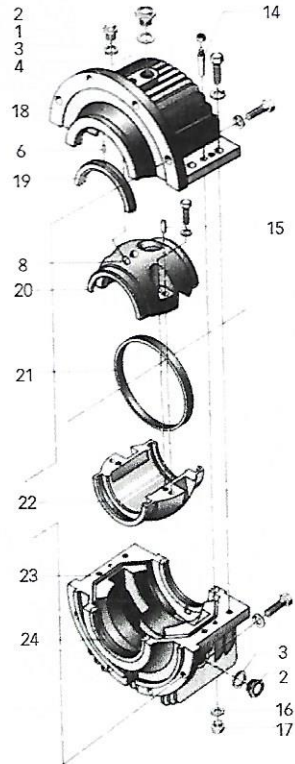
Ring-lubricated flange-type sleeve bearings (examples, delivered design may deviate in details)
